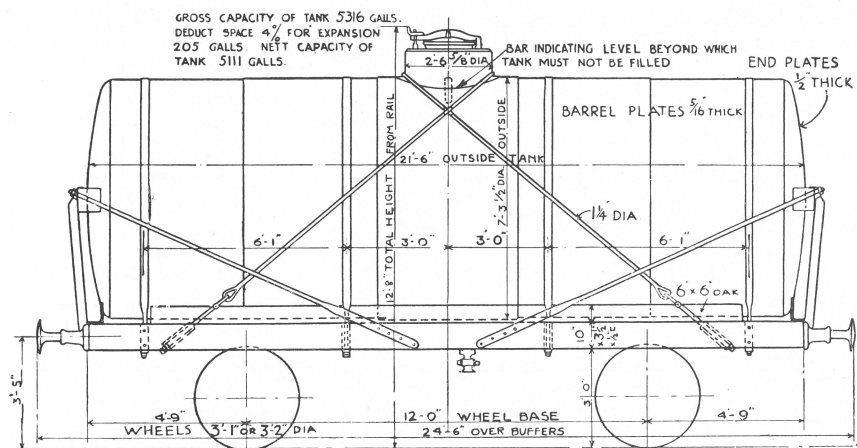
Private Owners' Standard 20-ton Tank Wagon (side elevation)
